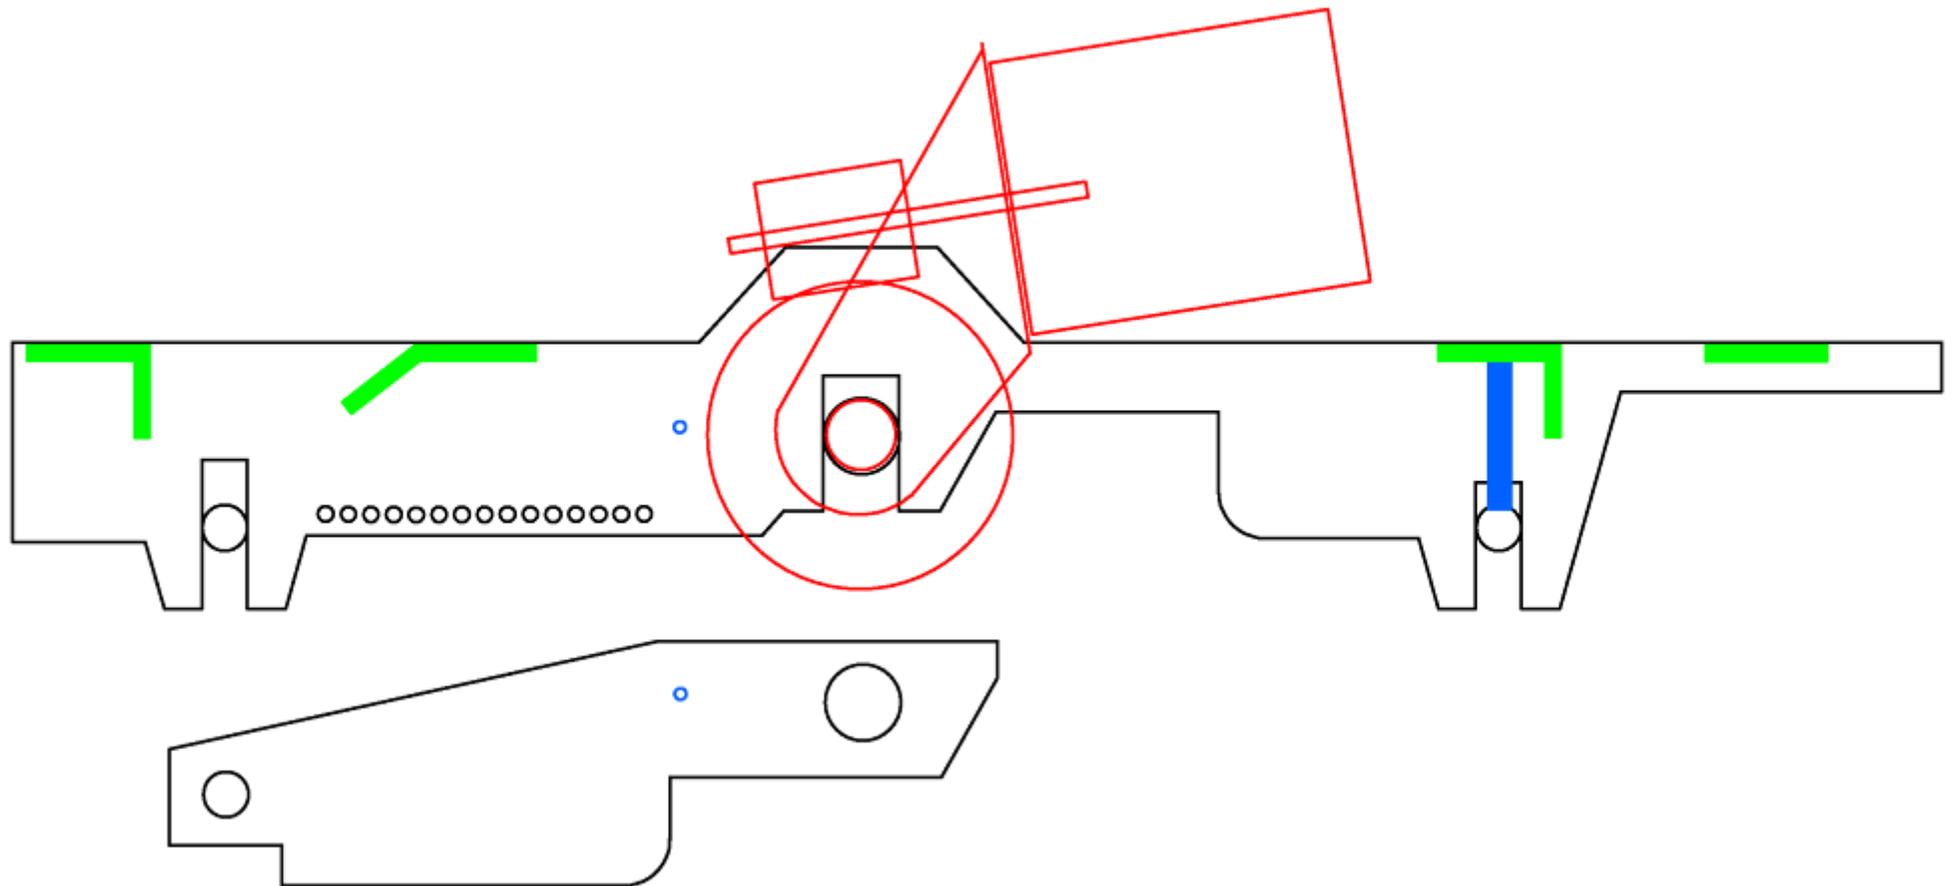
The assembled chassis with the motor angled towards the front. The motion (static representation) and other inside areas still in primer.
